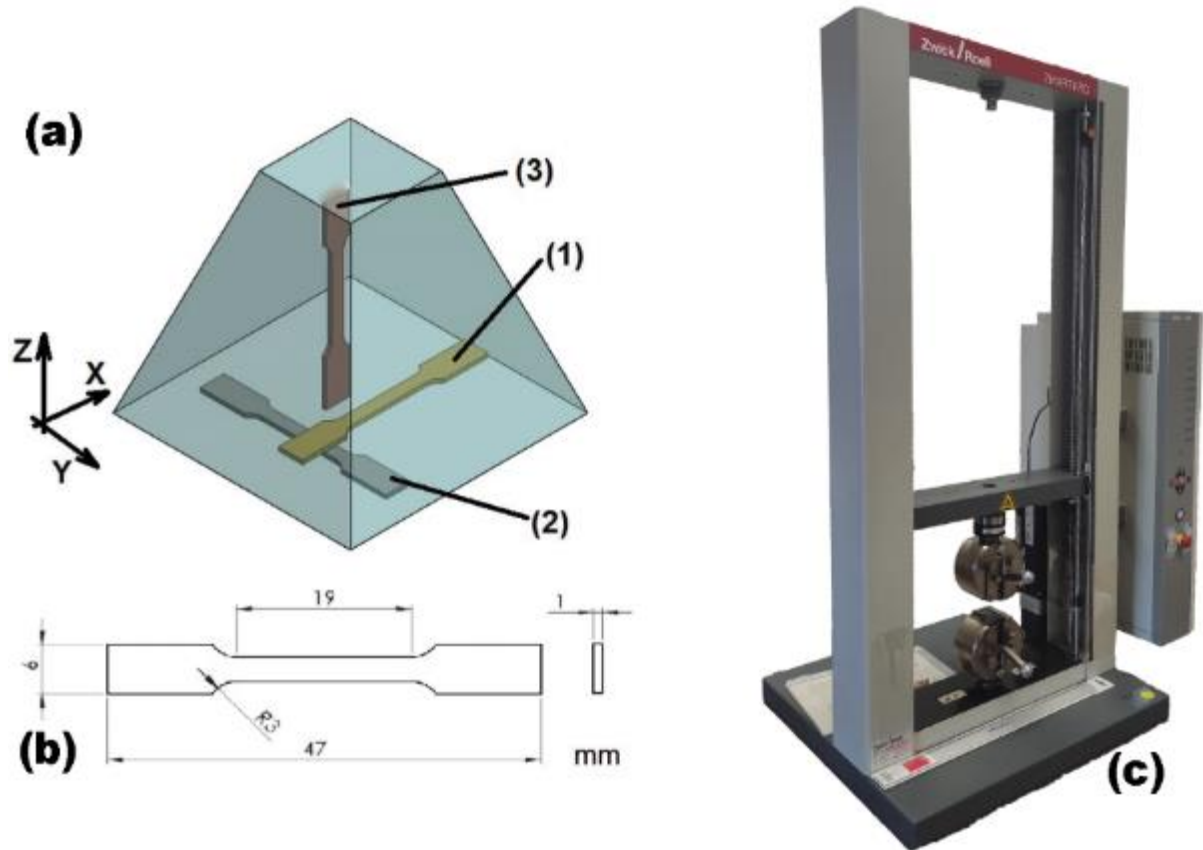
(a) Scheme for tensile samples machining from a CSAM-ed bulk, (1) X-direction on the XY-plane, (2) Y-direction on the XY-plane, and (3) Z-direction on the XZ-plane. (b) Tensile testing sample. (c) Equipment for tensile testing.
